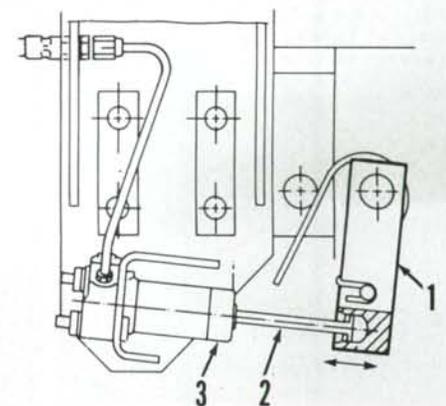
View of clutch slave cylinder and release lever used on Models 1294, 1394, 1494 and 1594 equipped with a cab and independent type clutch. No adjustment is required on these models. Refer to Fig. 155 for pto clutch linkage adjustment.
